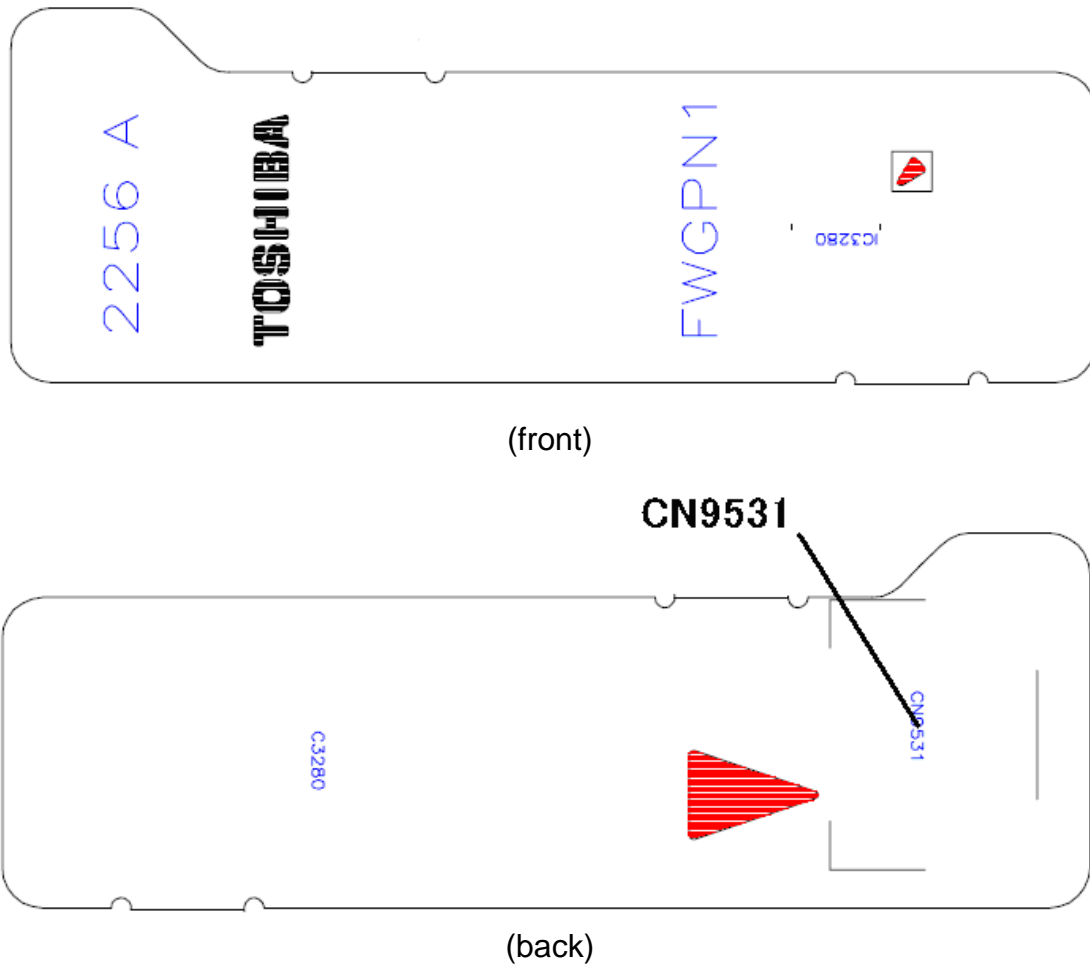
Panel Sensor board(FWGPN*) layout (front/back)
